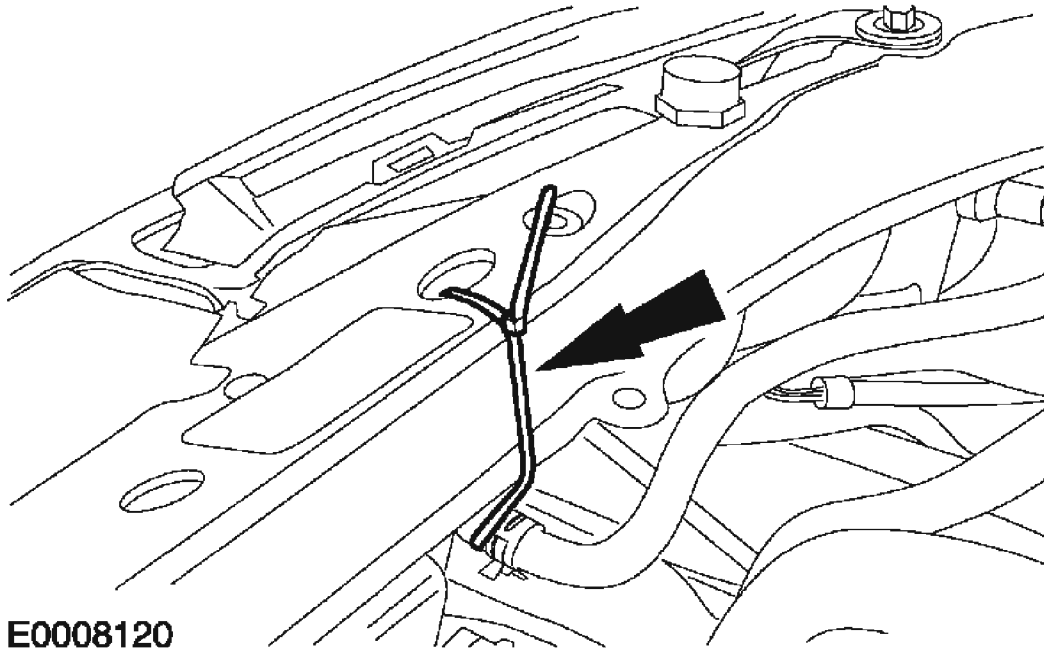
Securing Radiator To Radiator Support Using Cable Tie
